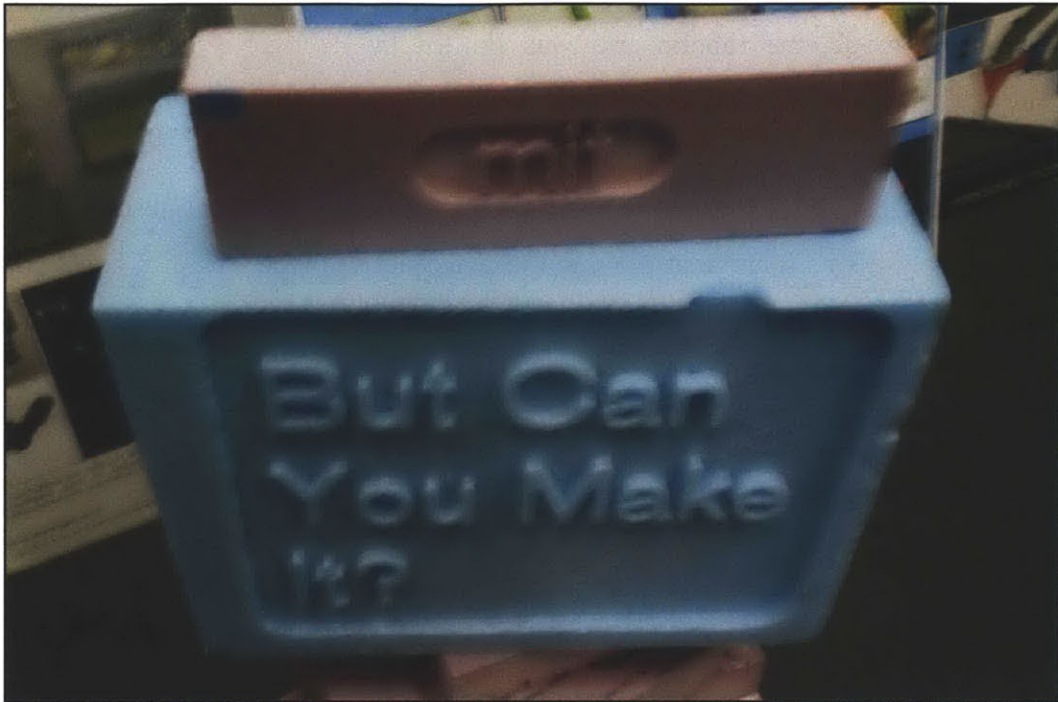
Polystyrene foam signs milled using the robotic arm platform.
